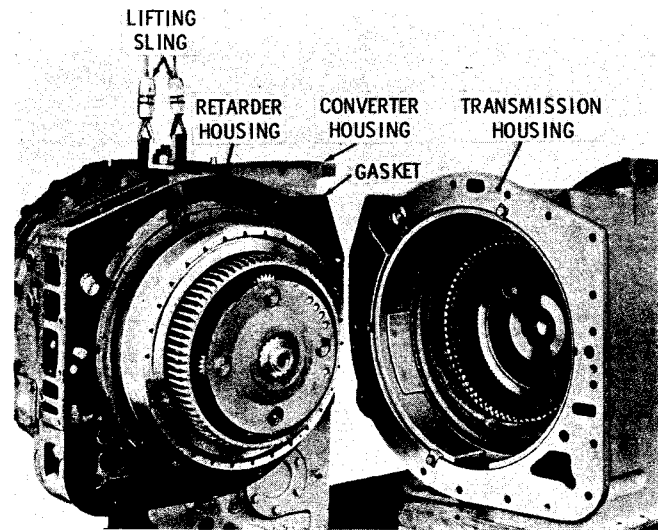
Removing torque converter, converter housing and retarder housing (CBT, CLBT, VCLBT)
